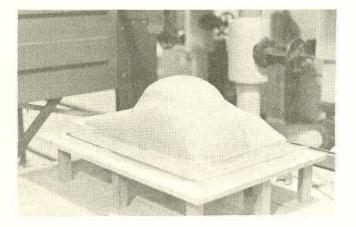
Hard, positive impression shown ready for vinyl to be vacuum formed over it
